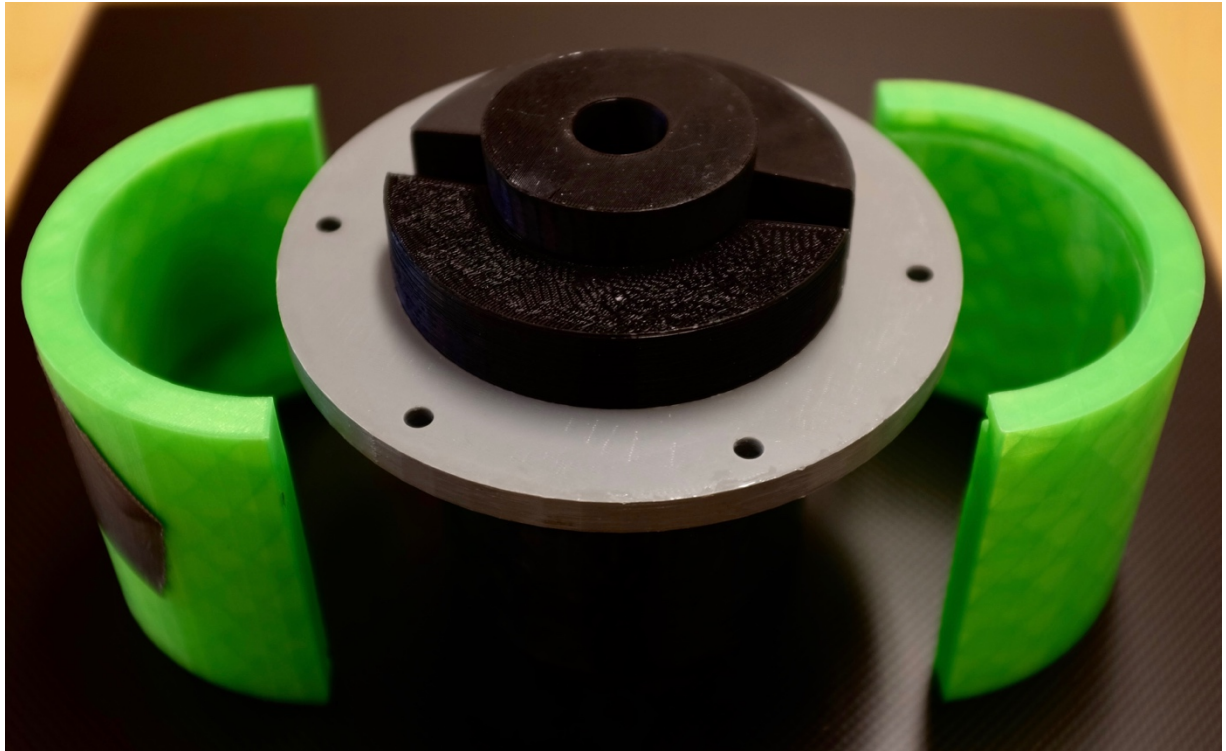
3d-print - Collapsible Inner Mold and Demountable Outer Mold
